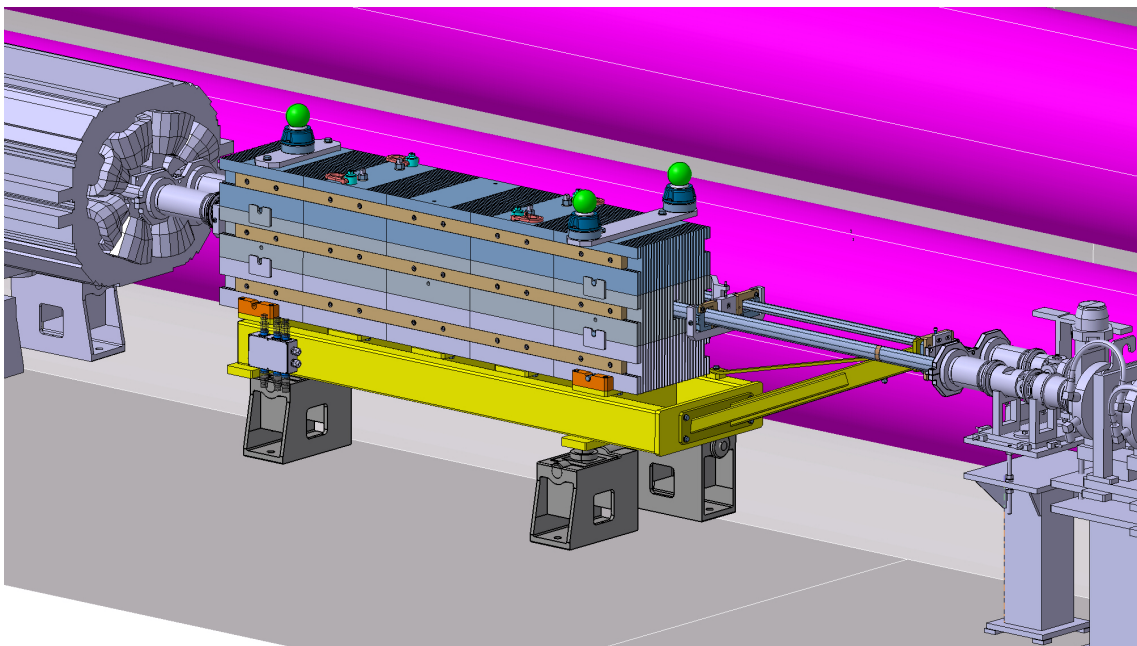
Preliminary integration drawing of the TCAPM. Courtesy of L. Gentini and integration team [8].
